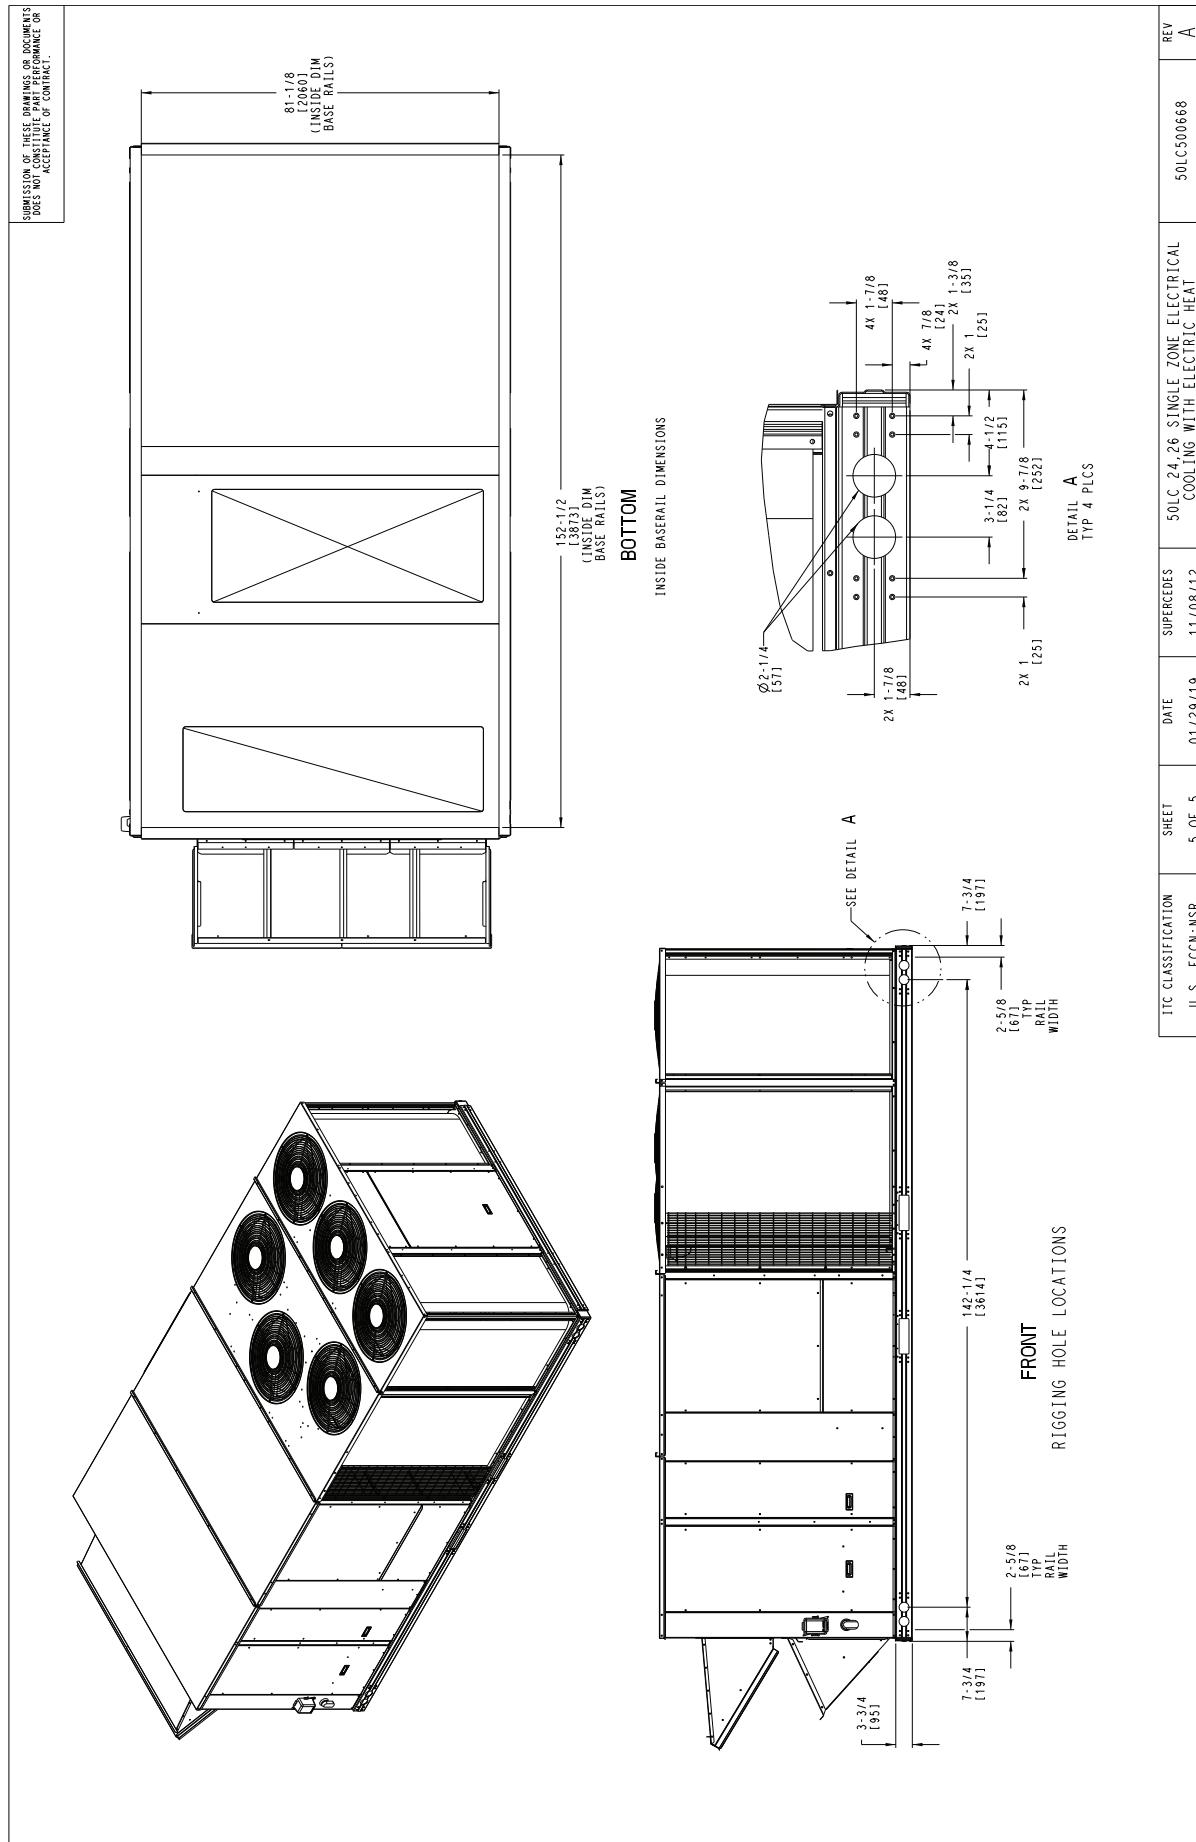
50LC Bottom View (Sizes 24-26)
